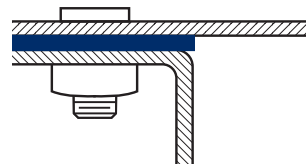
Insert Pressed-In and Flared Makes EMI Tight Joint (Alternate: Weld or Cement with Conductive Epoxy)
